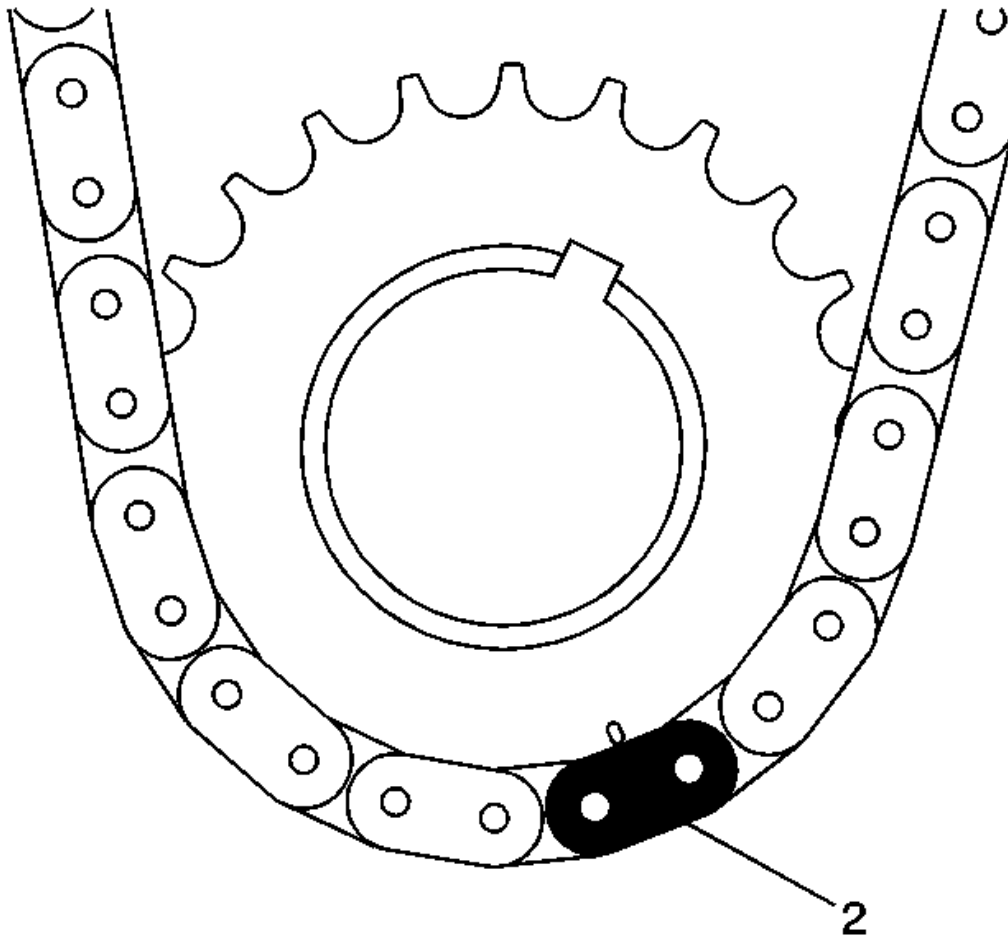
Identifying Timing Chain Colored Link & Crankshaft Sprocket Timing Mark
